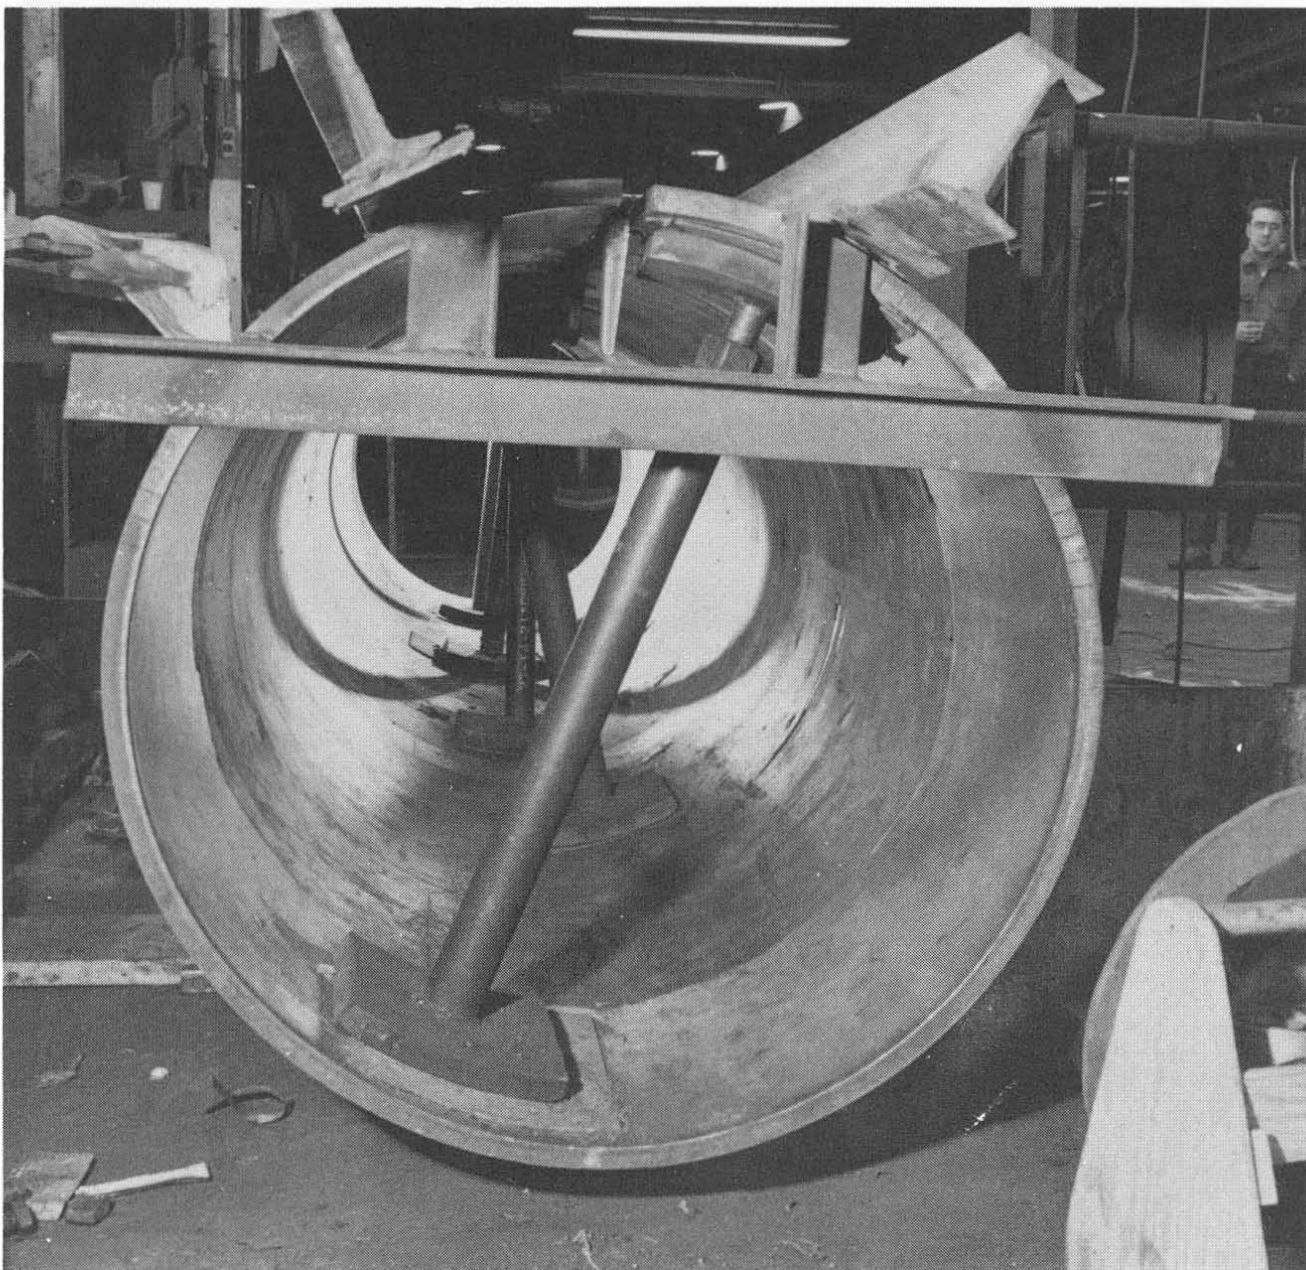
Tank cylinder braced ready for cutting "J" groove.
